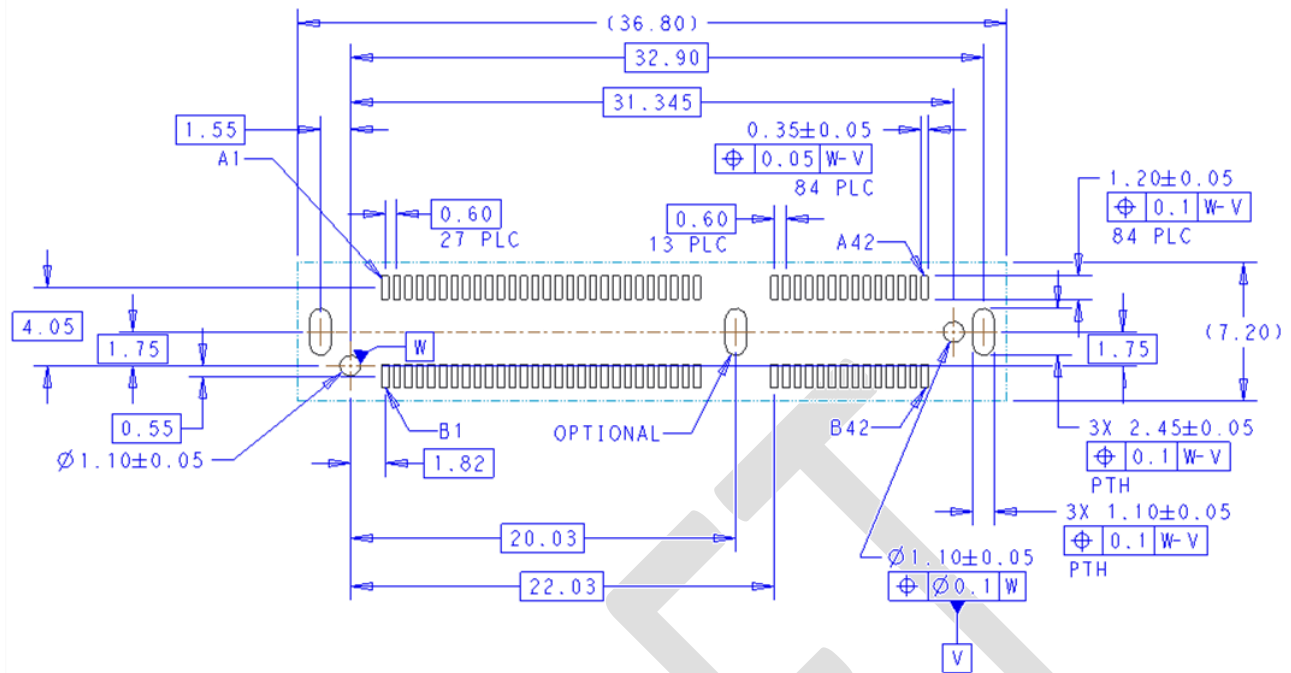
2C STRAIGHT CONNECTOR FOOTPRINT
